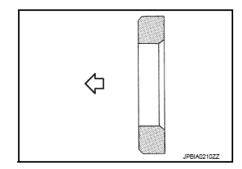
Identifying Pilot Converter With Chamfer Facing Crankshaft Courtesy of NISSAN NORTH AMERICA, INC.
